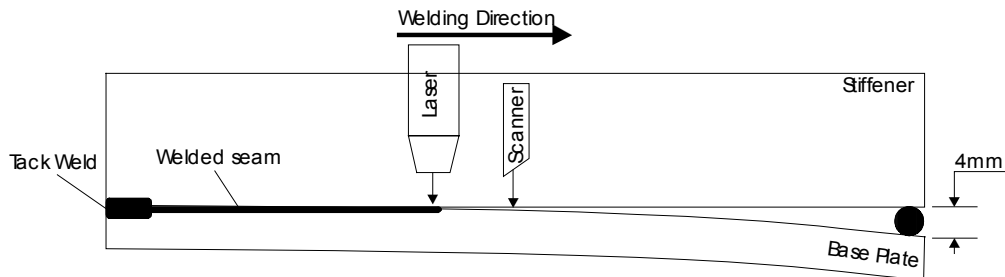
The weld groove is contracted by the heating and cooling from the welding process. The contraction is significant at the position of the line scanner.
